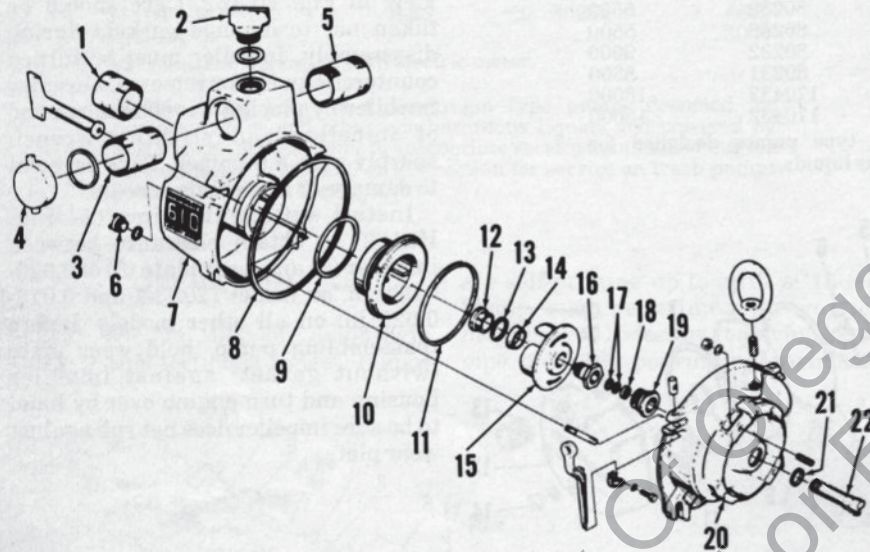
Exploded view of model 123TP4 trash pump. Model 160 TP4-1 is similar.
